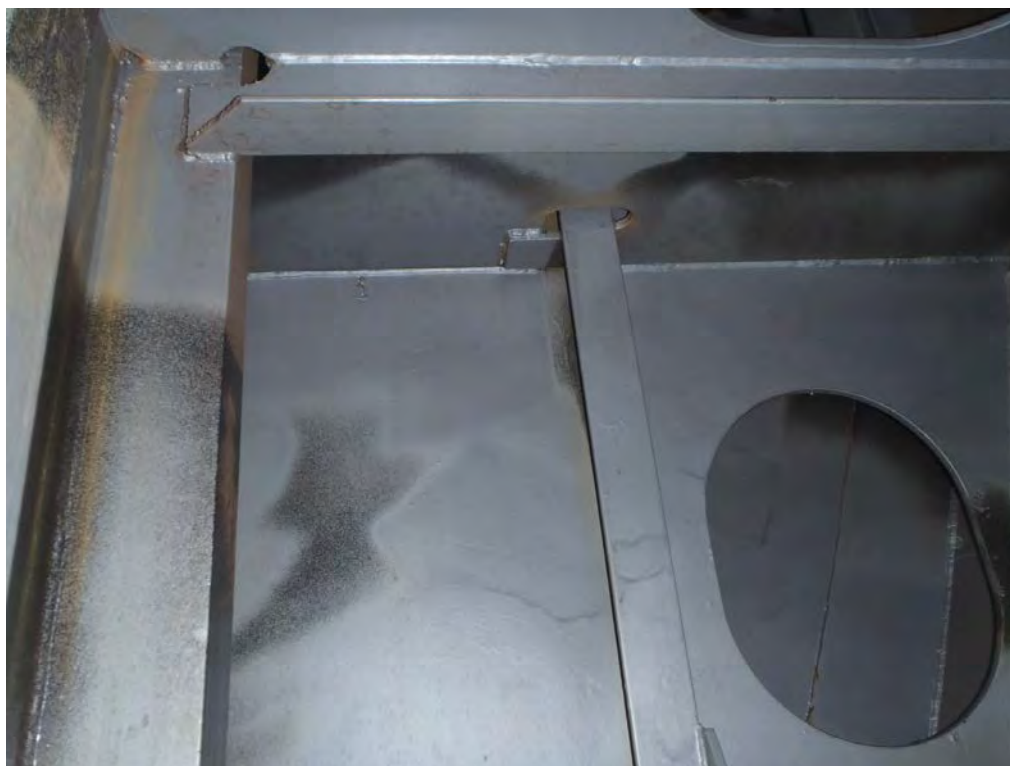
STBD FWD Sewage Tank – Detail 2
